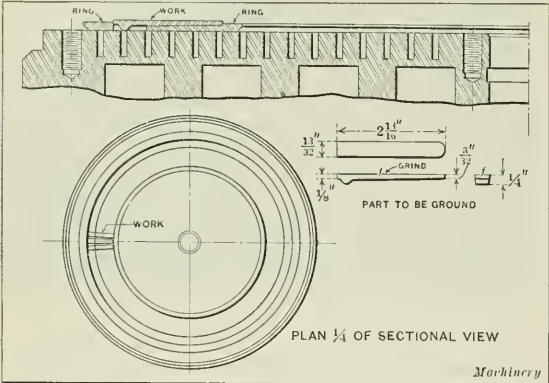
Method of holding a Magazine Follower on a Blanchard Magnetic Chuck
